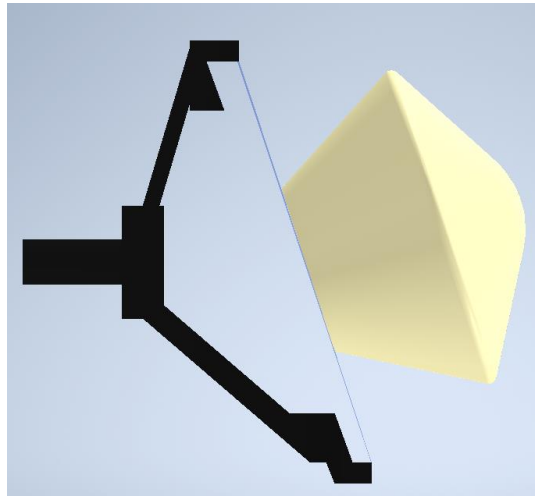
Edge holder holding Stardust capsule for free to oscillate testing.
